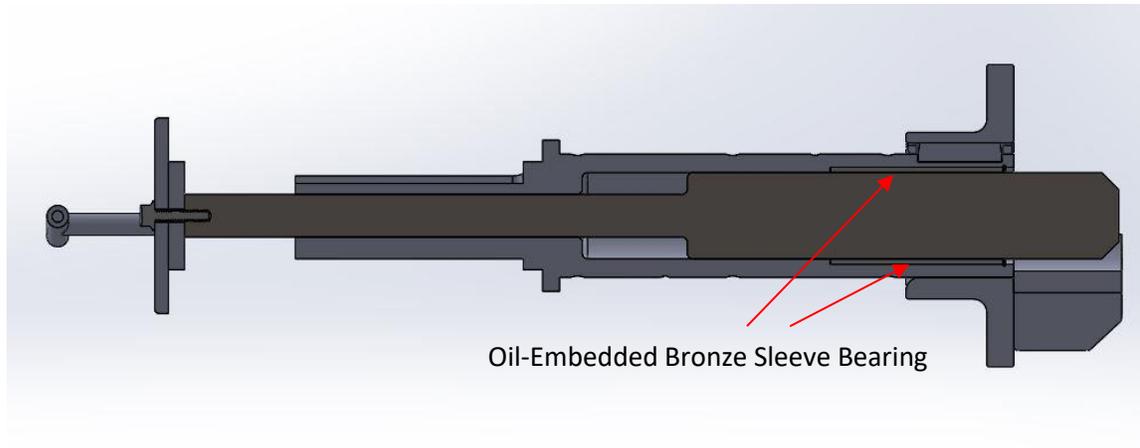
Cross-Sectional View of Final Drive End Retractable Shaft Assembly
